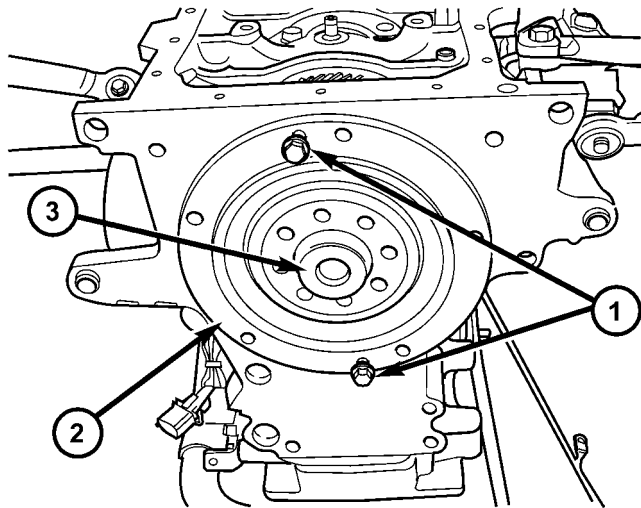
2.5L REAR MAIN BEARING SUPPORT
